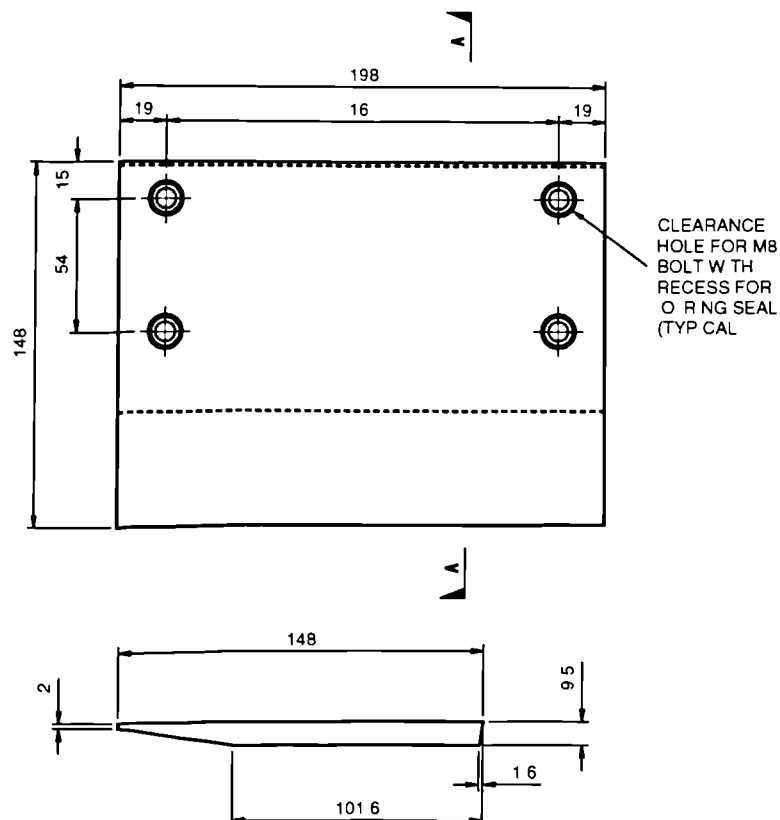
Plan and section through tapered aluminium plate used to separate the membranes containing compressed air and dense fluid
